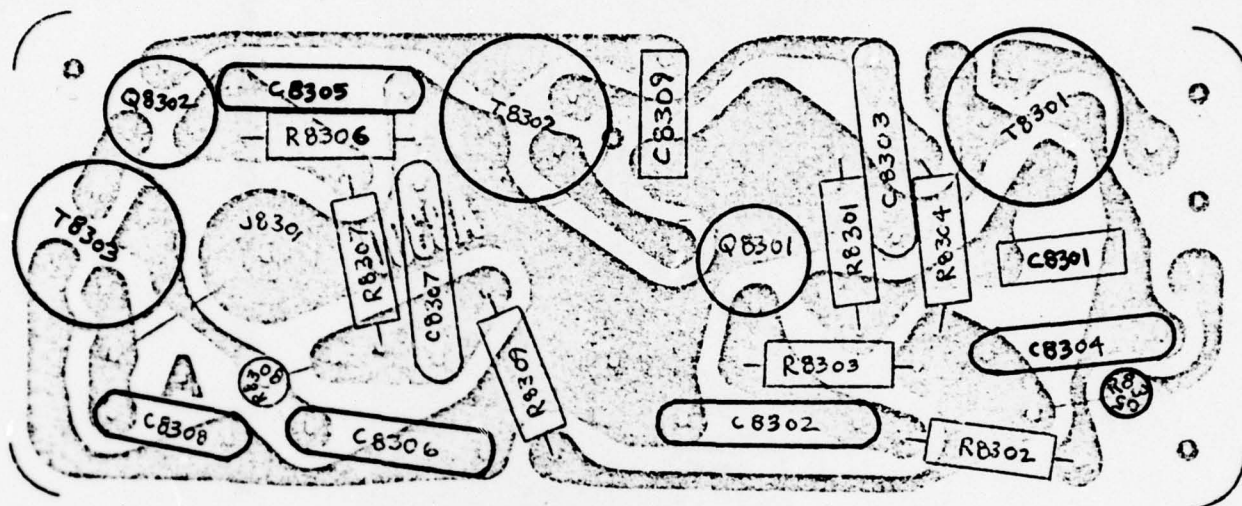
P.C. BOARD LAYOUT FOR THE A8300A TRANSMITTER
